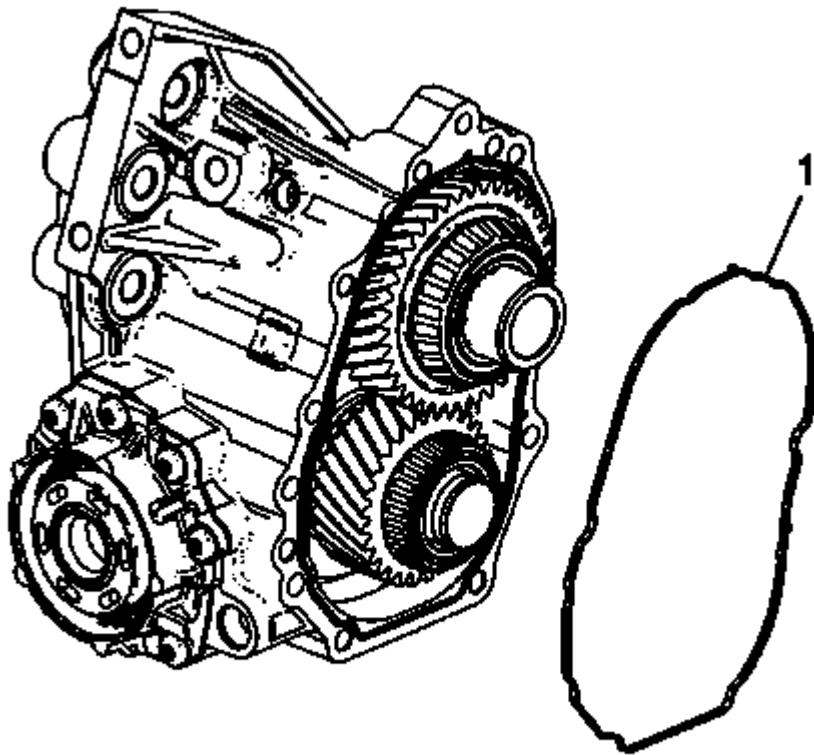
Rear Extension Housing-To-Transfer Case Seal
